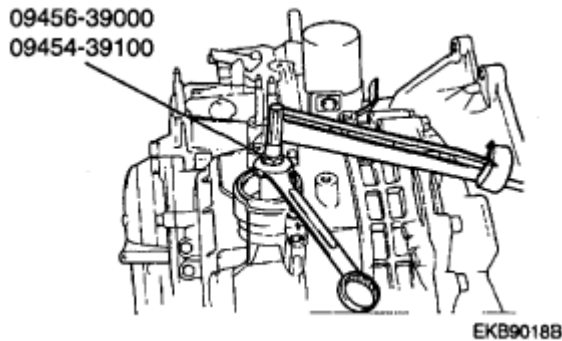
Locating Low & Reverse Brake Spring Retainer
